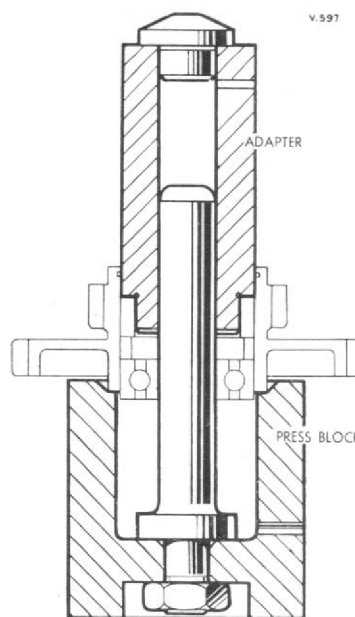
Pressing ball bearing, outer spacer, and roller race clear of fuel pump drive idler gear.
